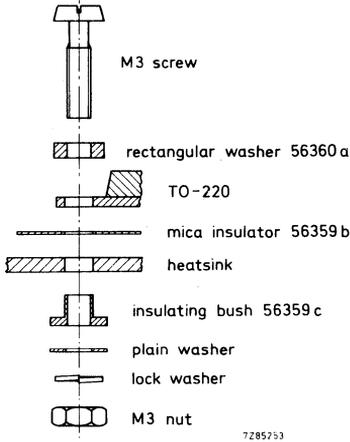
Insulated screw mounting with rectangular washer. Known as a "bottom mounting".
